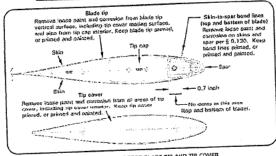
MAIN ROTOR BLADE TIP AND TIP COVER
